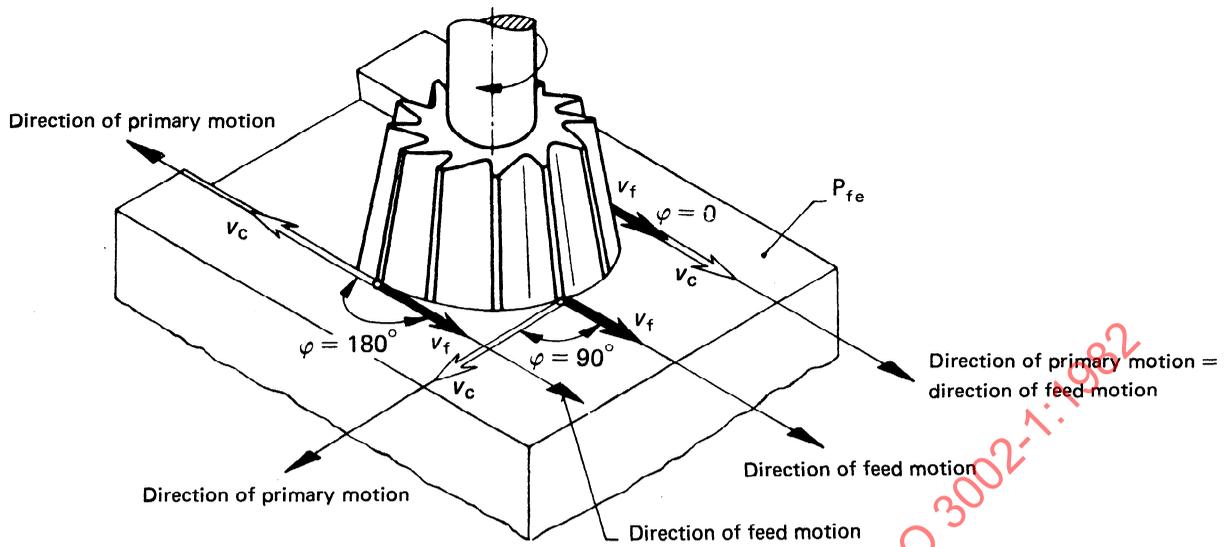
Tool and workpiece motions considered at three selected points on the cutting edge — Single angle cutter with parallel shank
